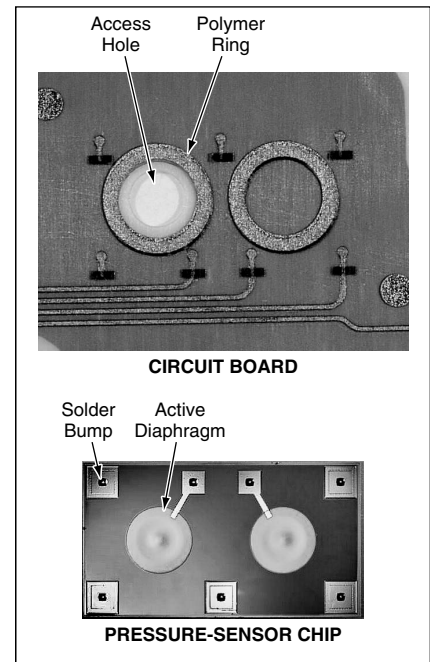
The Pressure-Sensor Chip and Circuit Board are shown here as they appear before they are put together by use of a modified flip-chip technique.
